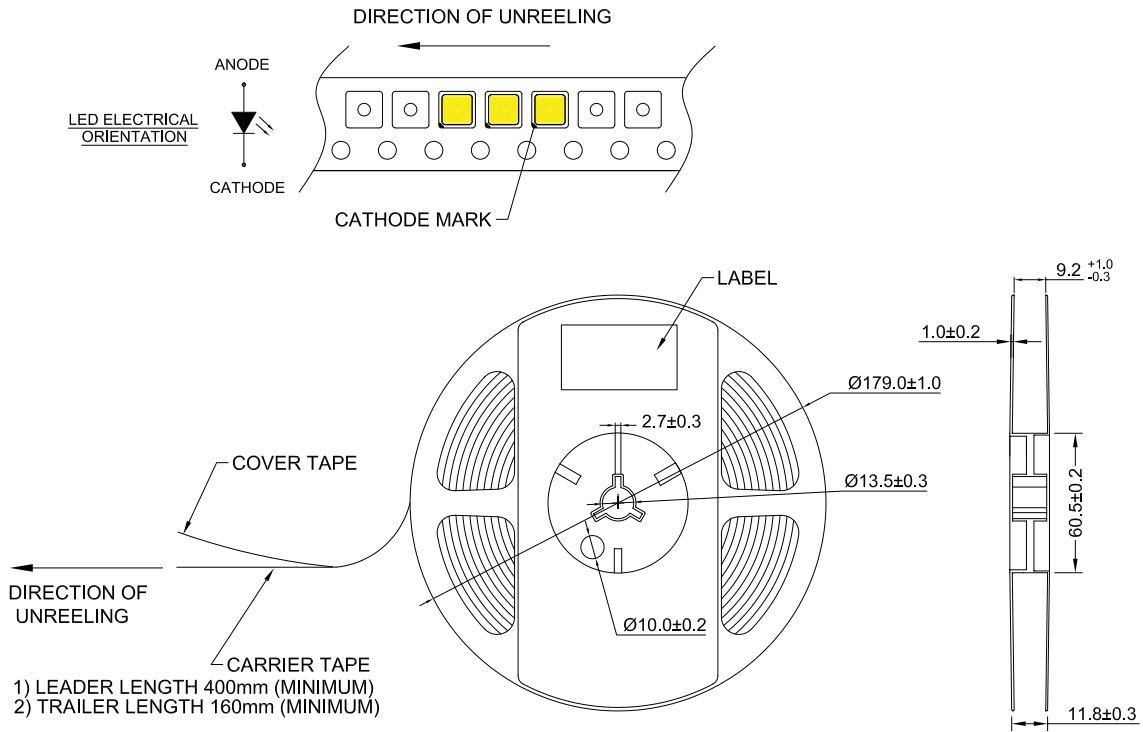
Reel dimensions for LUXEON 3030 HE Plus – Deep Dimming.
